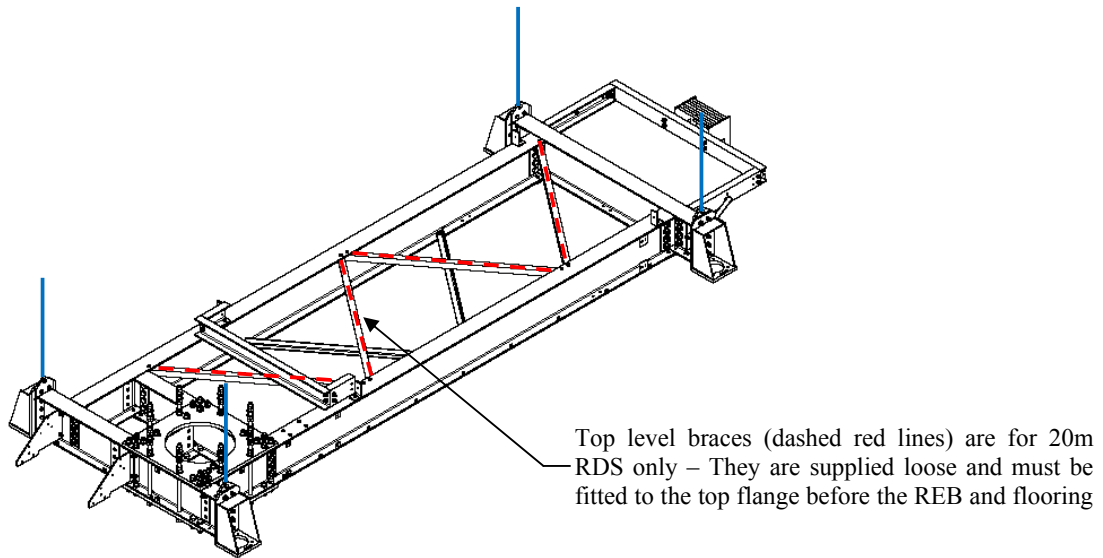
Narrow Frame – Fully assembled frame with slings (in blue colour) attached to lifting lugs for lifting.
